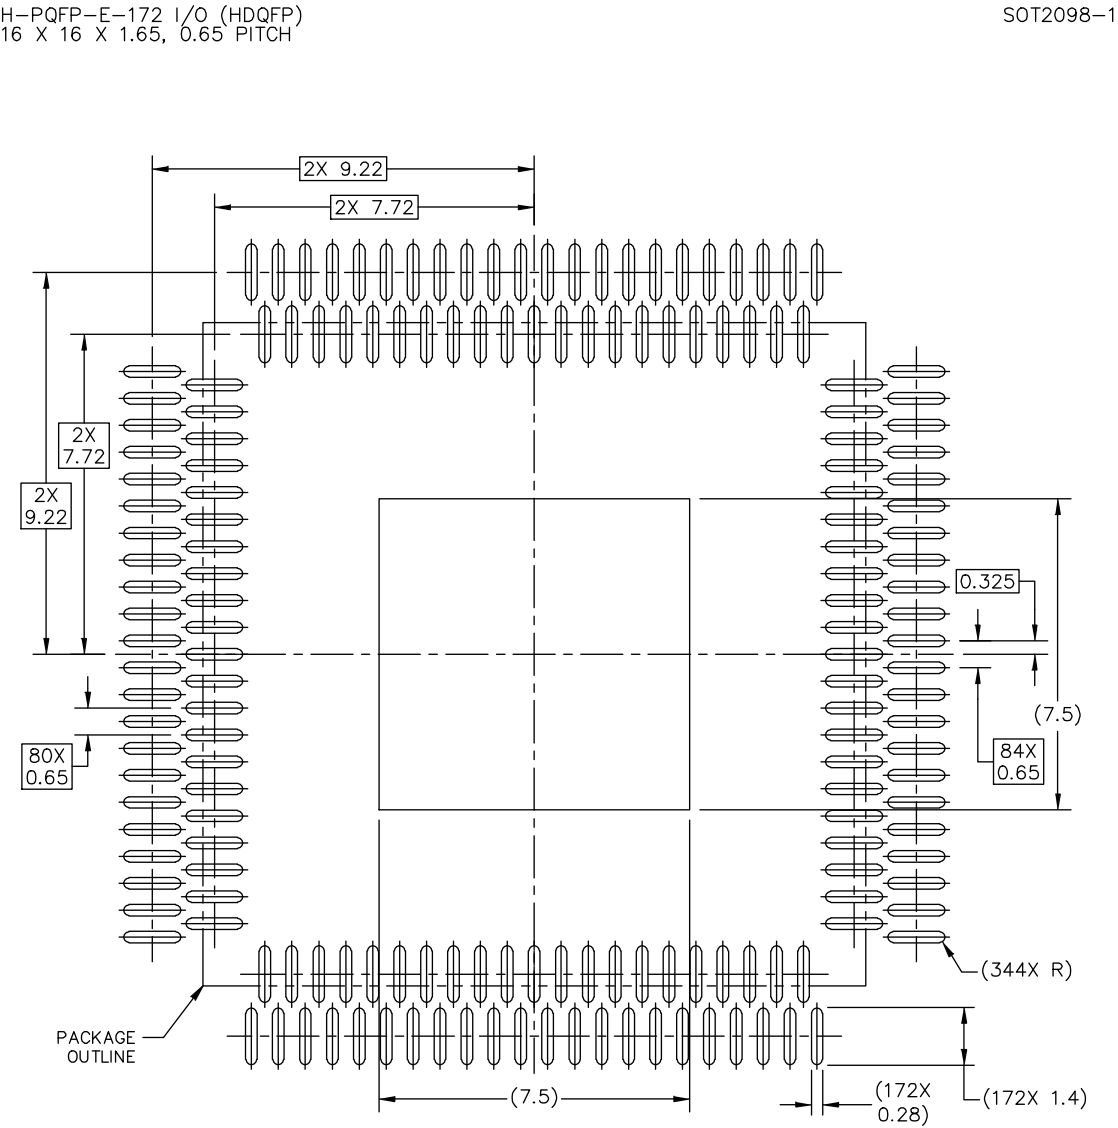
Reflow soldering footprint part1 for HQFP172 (SOT2098-1)
